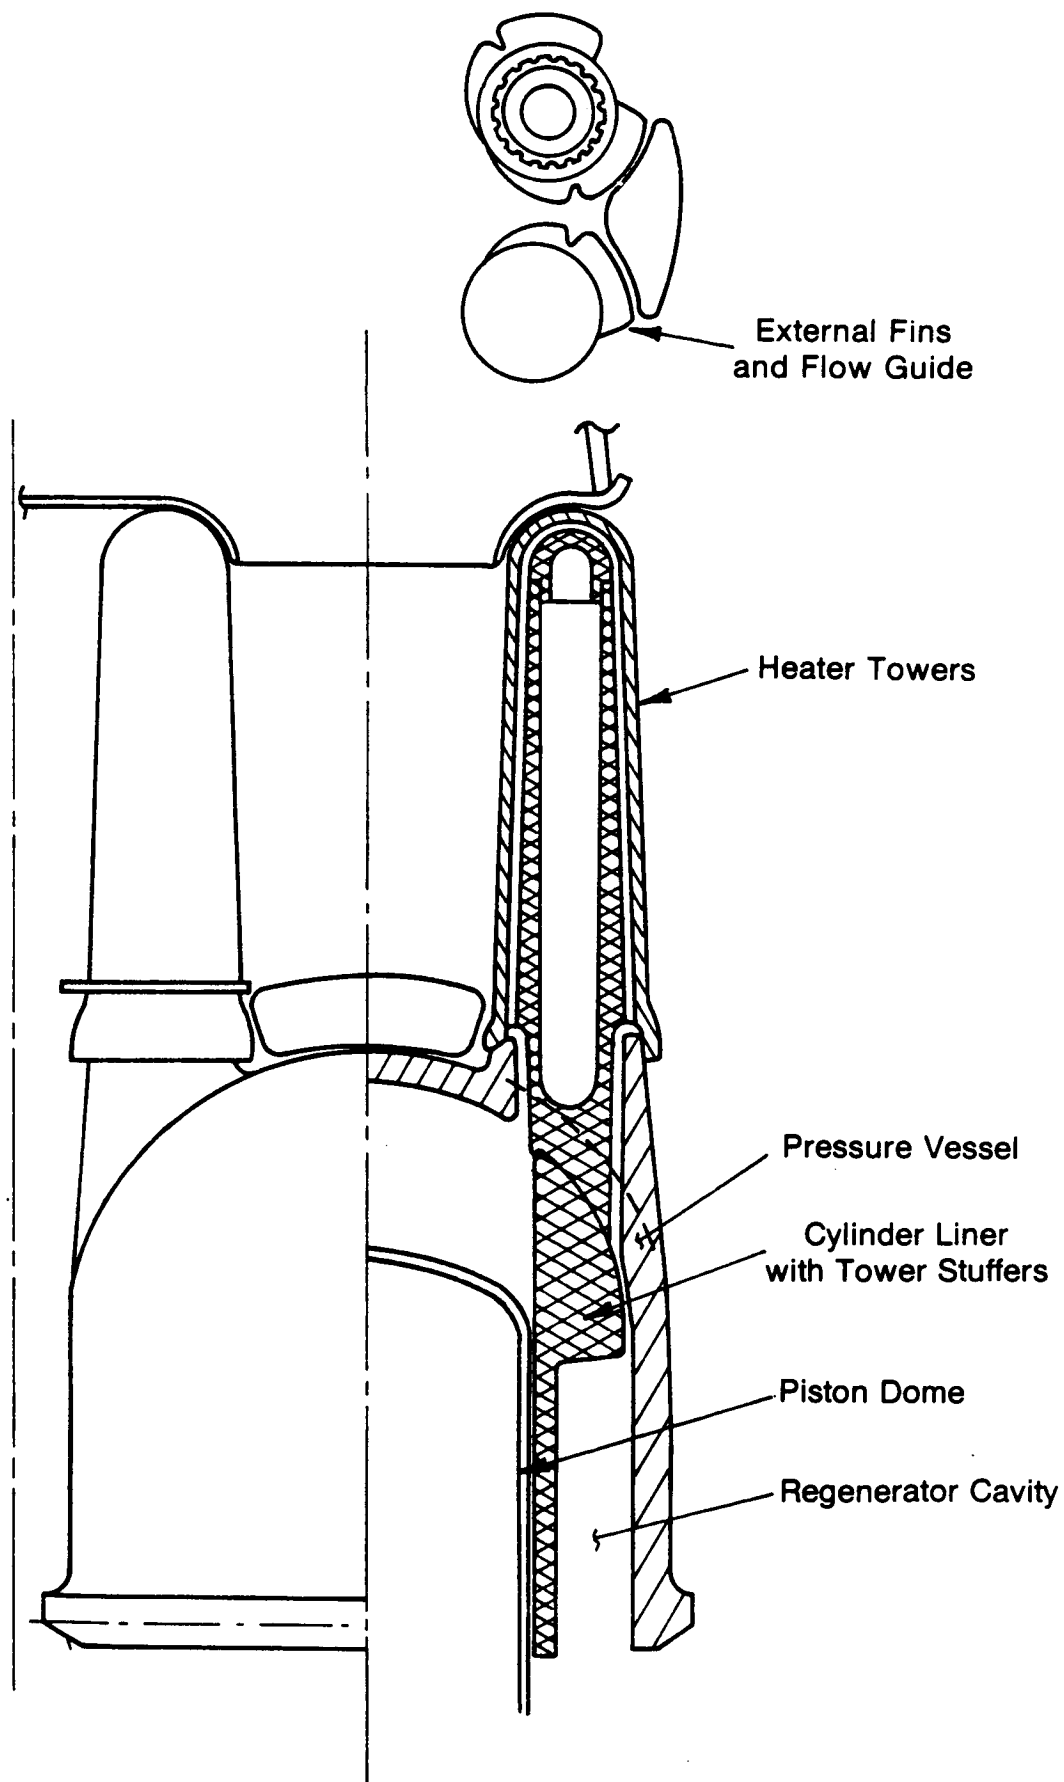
ASE Ceramic Heater Head Concept A - Six-Tower Design
